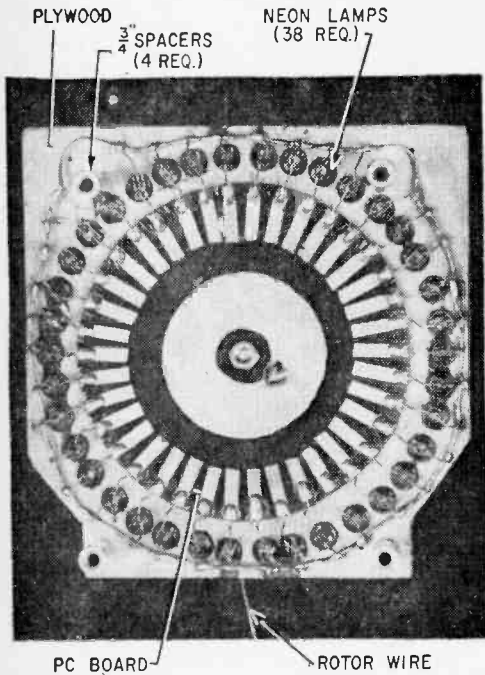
View of commutator shows neon lamp connections. You could use a larger PC board and use copper-clad as a common.
